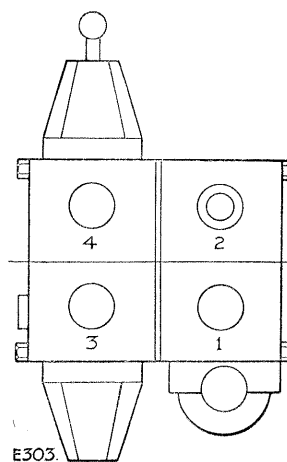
Rear view of control valve, showing sequence of pipe fitting
